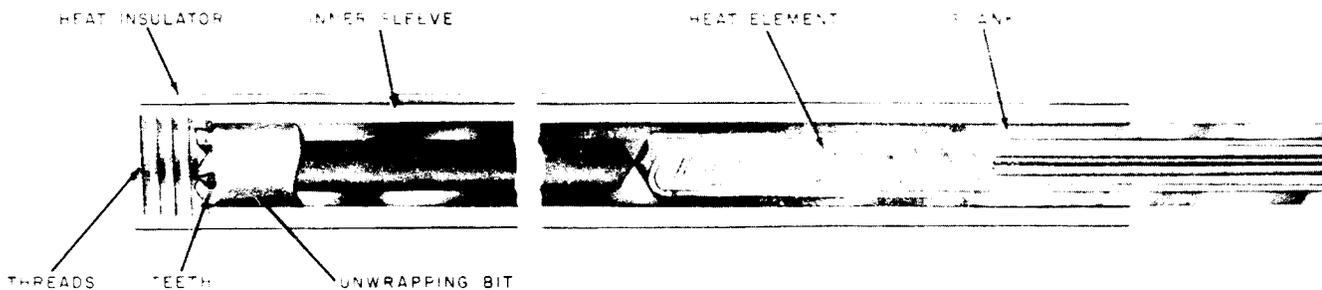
Cross-Section View of KS-16450, L1, Wire-Unwrapping Tool
